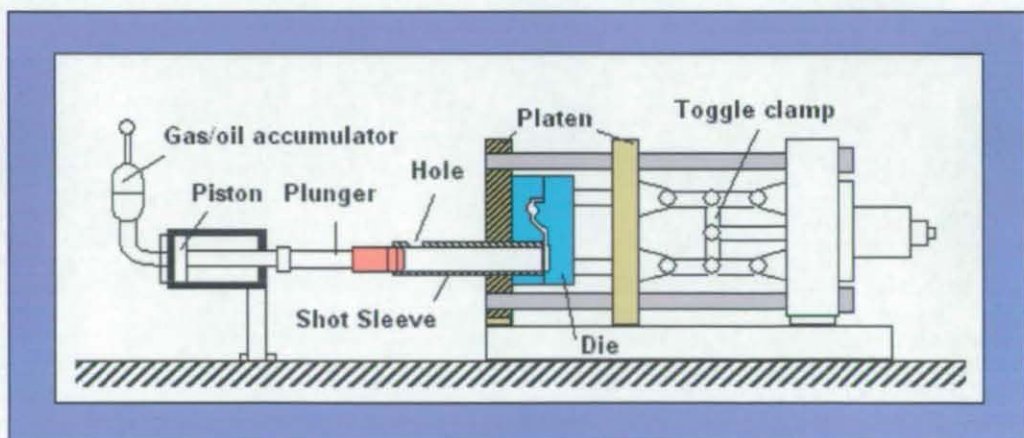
2 Cold chamber machine (Dynacast, 2004)
